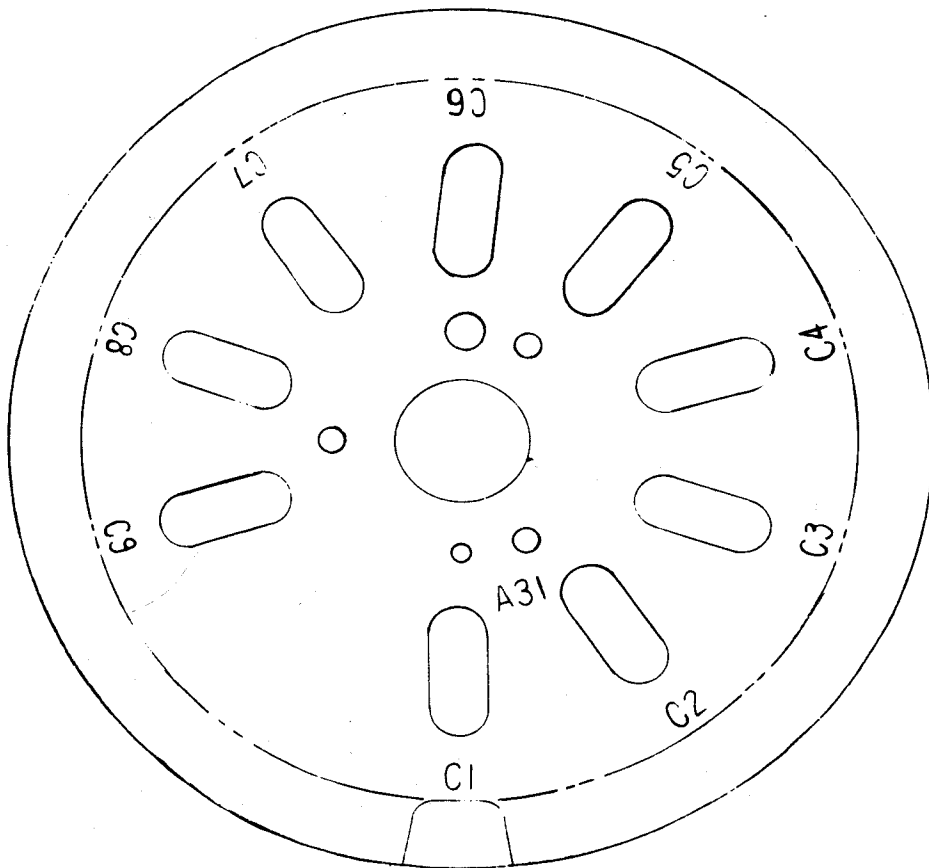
10 kHz Rotor Subassembly A2A4A31,
